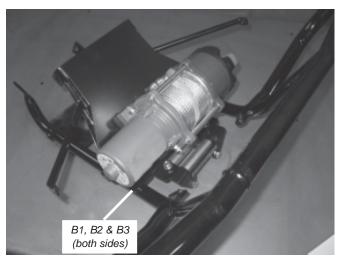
Place Winch, Mounting Plate and Roller Fairlead Assembly onto Front Bumper
